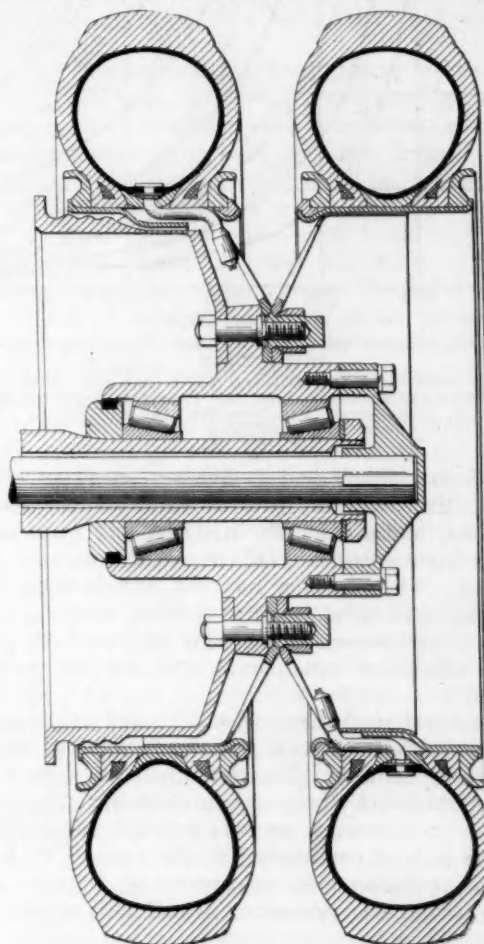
DIAGRAM SHOWING THE VERY SMALL CLEARANCE BETWEEN THE BRAKE DRUM AND THE RIM OF THE 32 X 6-IN. DUAL WHEEL
